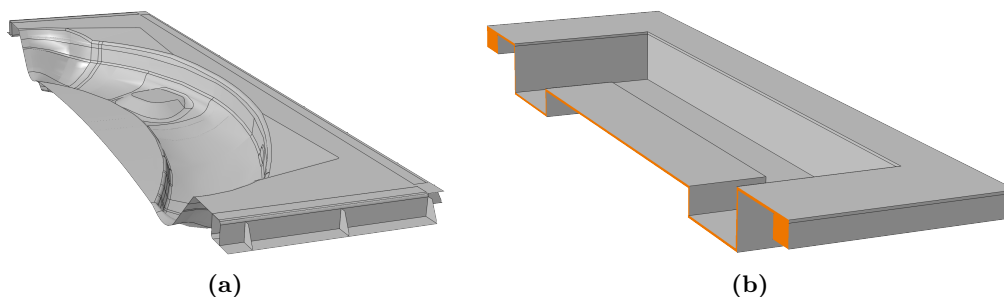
Picture of (a) mold and extraction frame and (b) top mold for SPF forming
